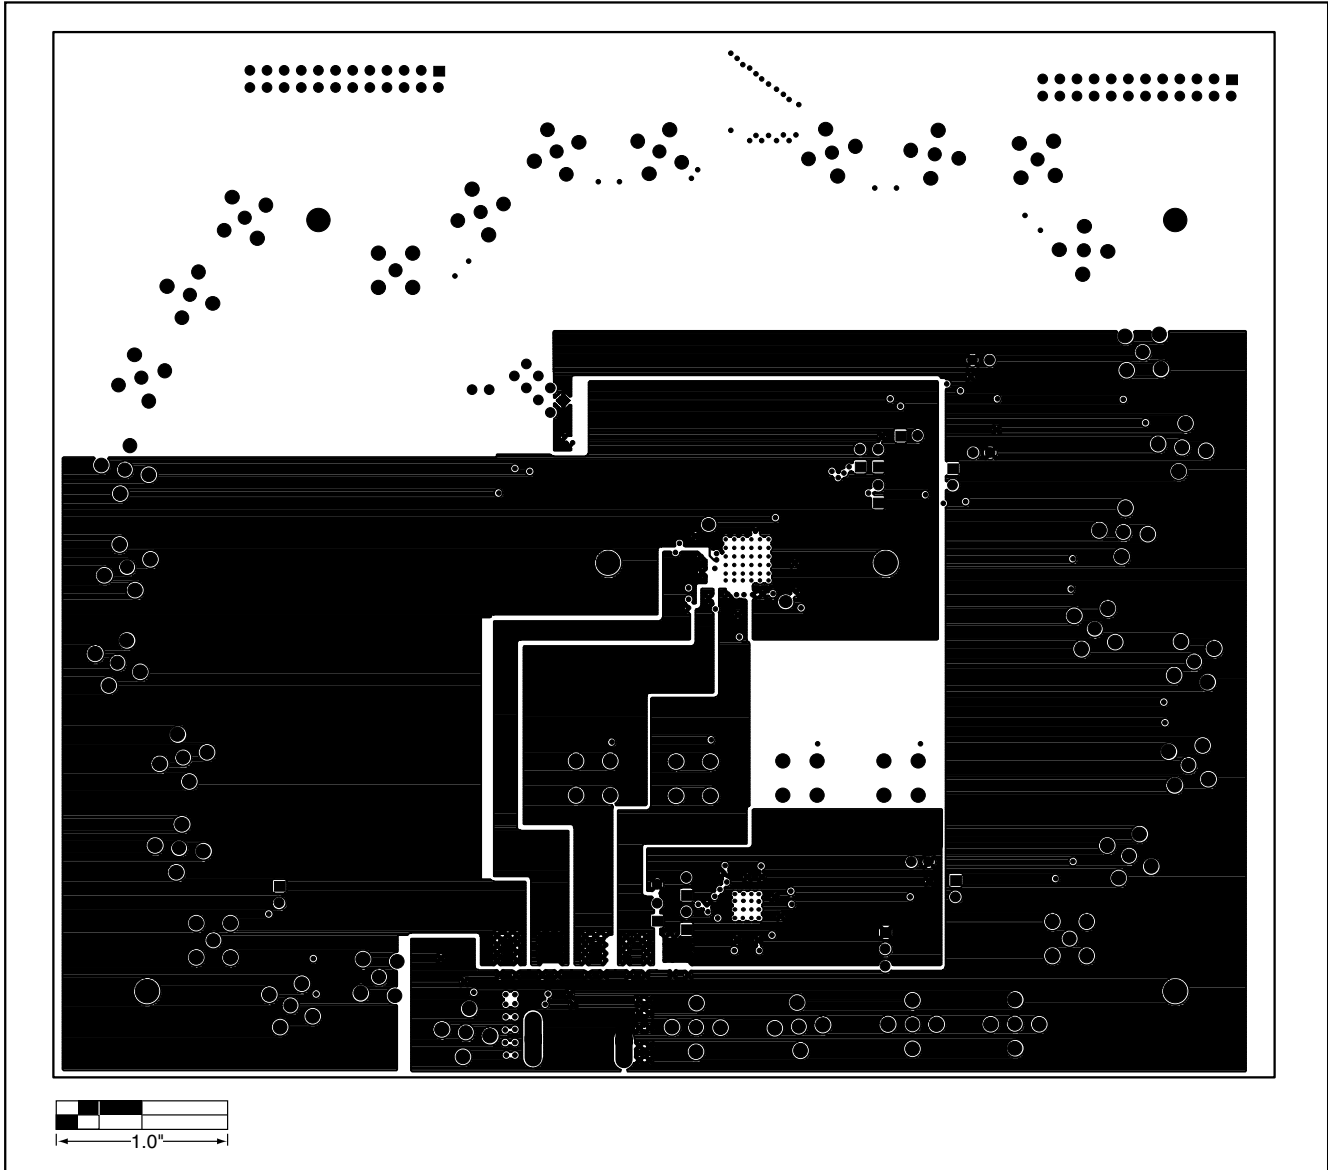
MAX3831/MAX3832 EV Kits PC Board Layout—Power Plane
